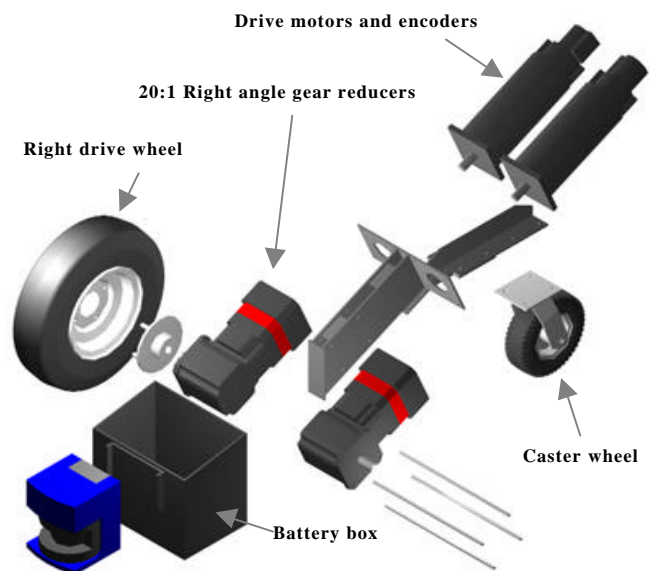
Exploded view of vehicle's base structure with attached laser range finder
